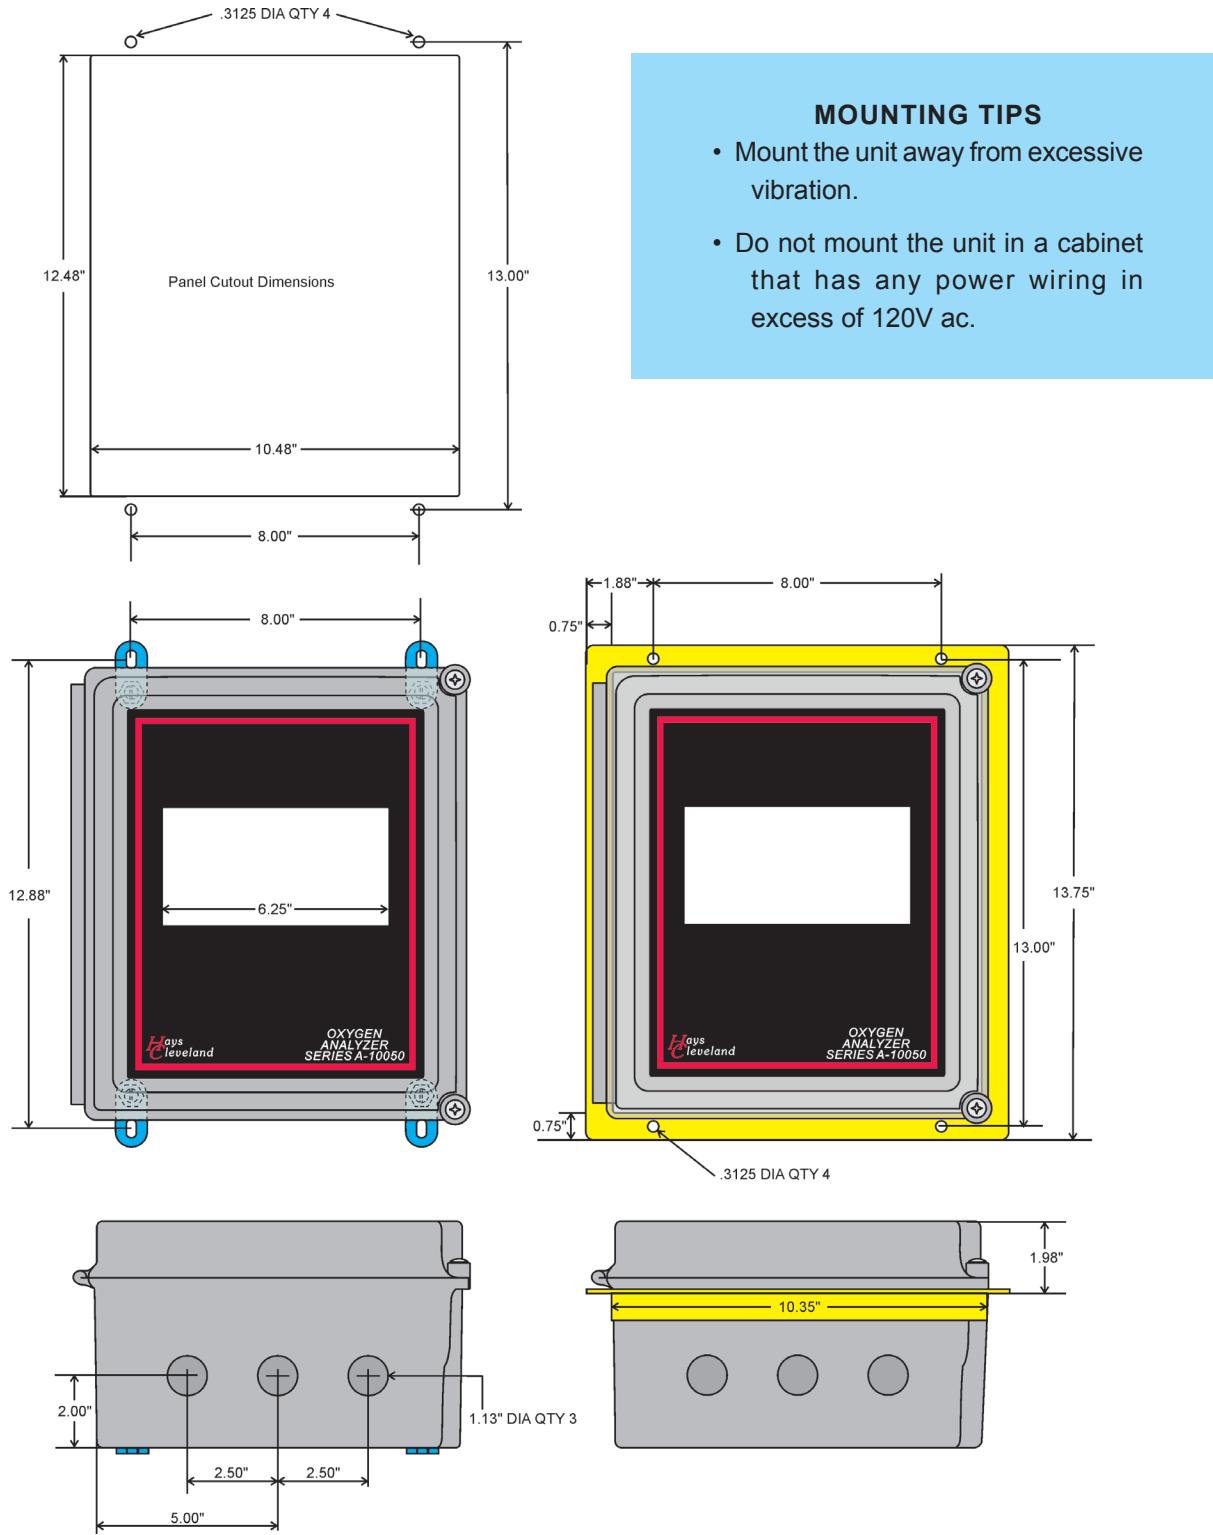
Housing: Cutout Dimension and Surface or Flush Mounting
